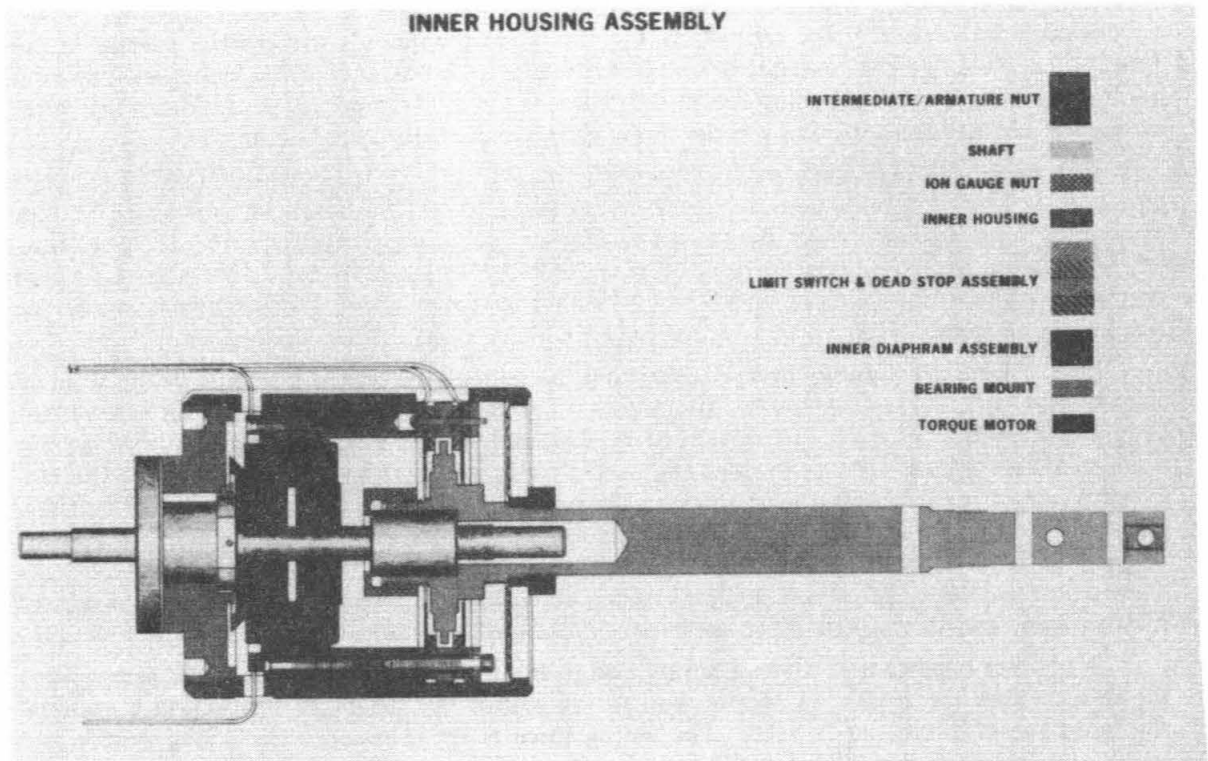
An assembly drawing of the precision inner module of the actuator. Shown are the 1) integral bearing roller screw, 2) torque motor, 3) screw bearing of the roller screw, 4) limit switch hardstop assembly, and 5) pusher shaft.
